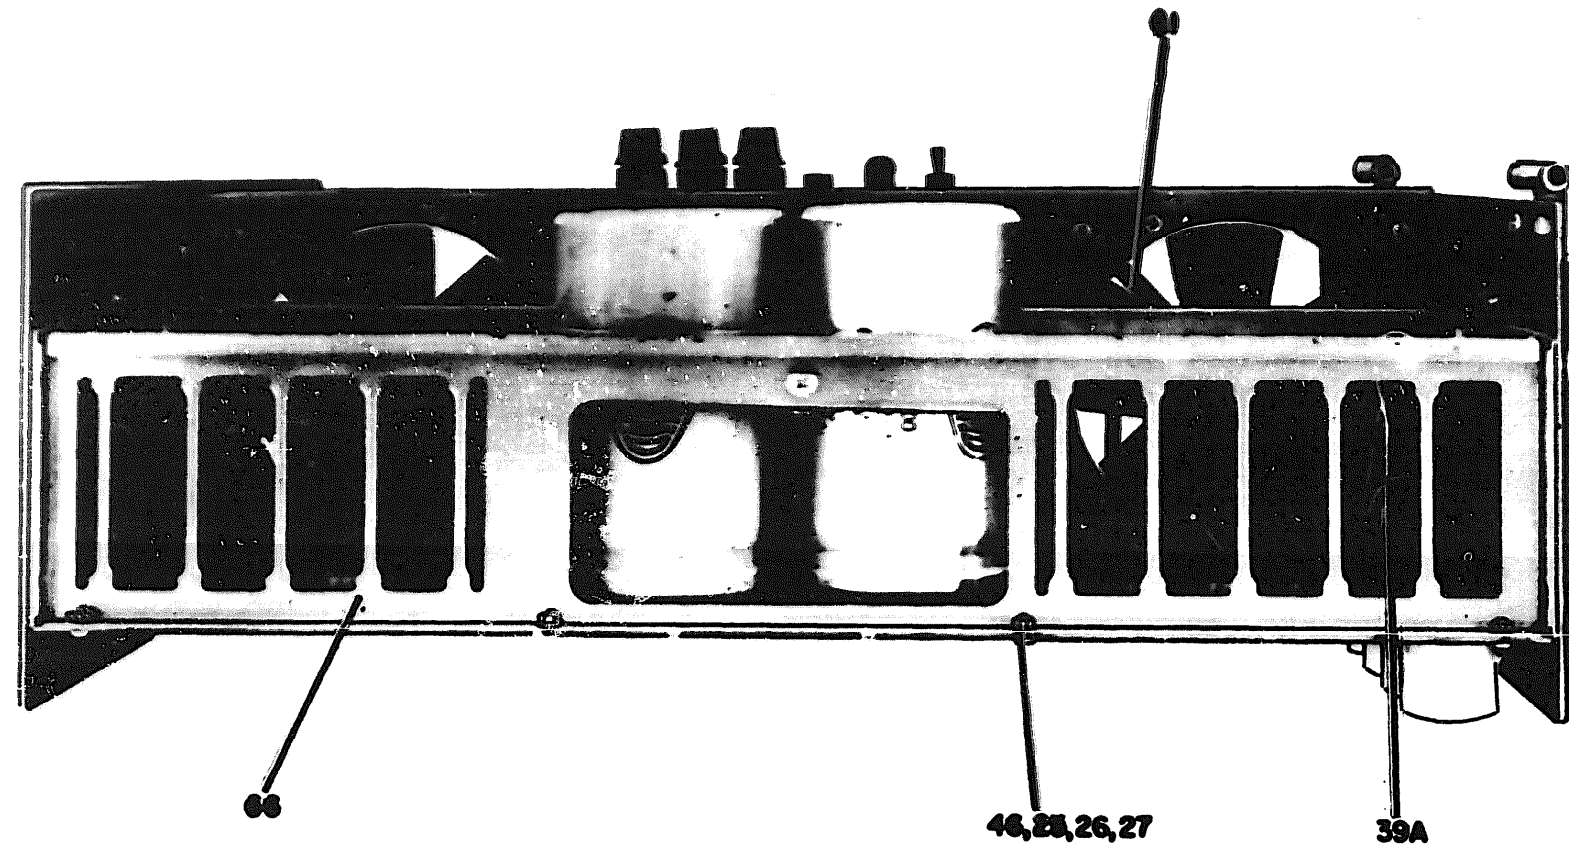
Circuit Card Assembly, Chassis (Sheet 2 of 4)
